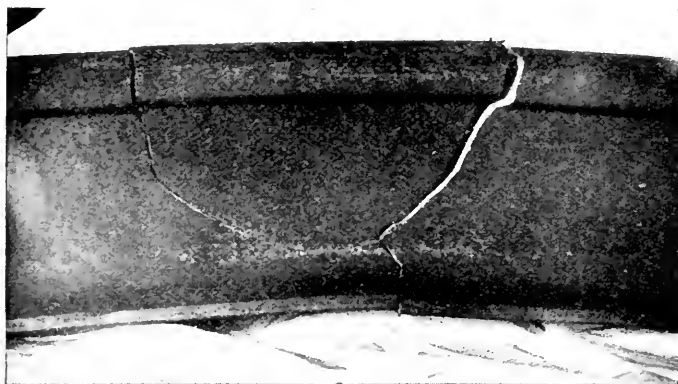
Side view of rail fractured in the testing machine; crescent-shaped piece detached. Rail from service.
